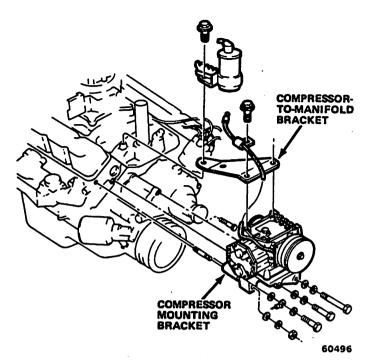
E-31 Compressor Mounting—Eight-Cylinder Engine
